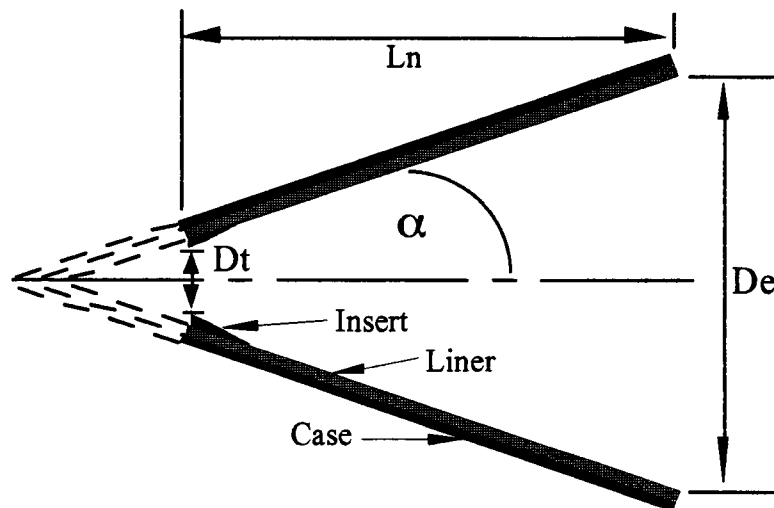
Axisymmetric Conical Nozzle Design with Dimensions
